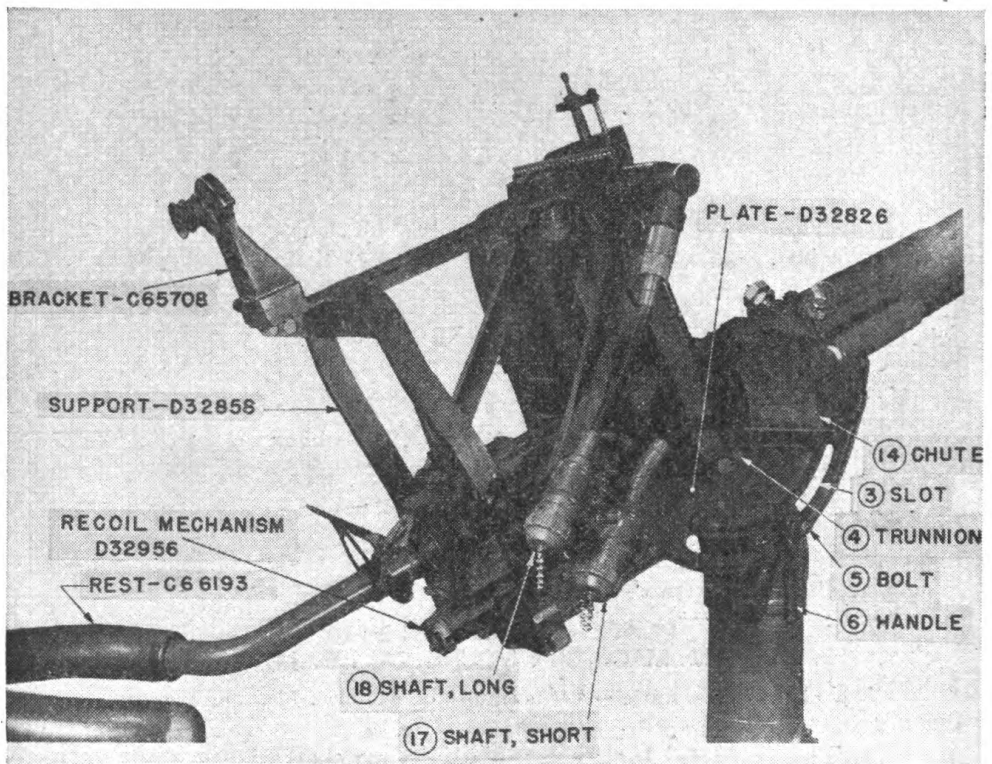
Antiaircraft machine-gun mount, caliber .50, M2.
